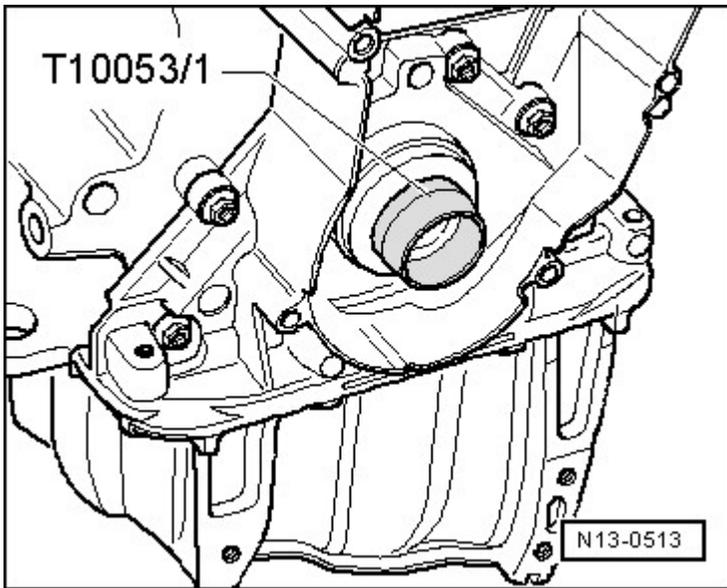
Identifying Guide Sleeve From Assembly Tool T10053 & Crankshaft Journal
